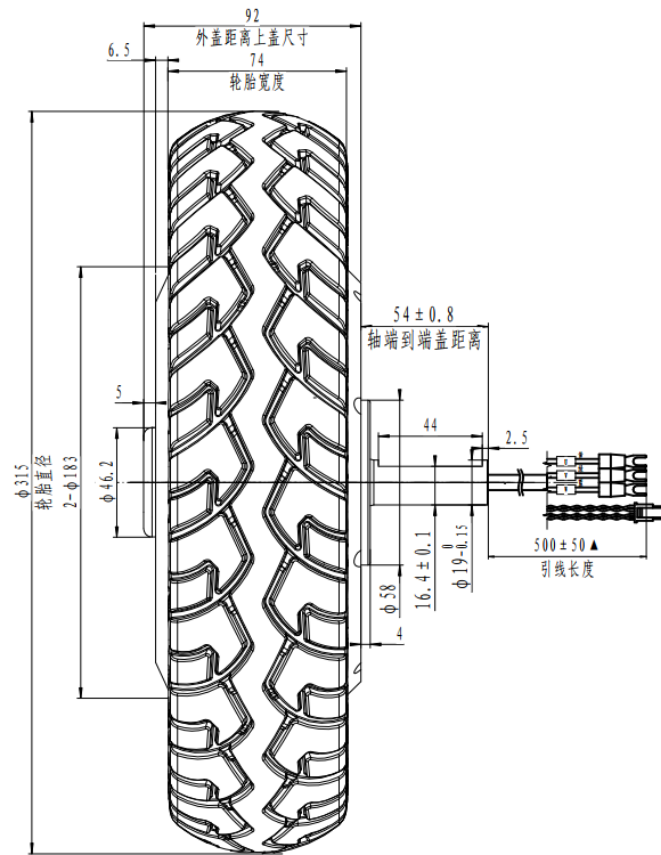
12 inch 30Nm hub motor mounting size
